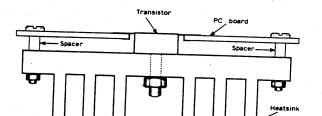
Mounting arrangements for pcb, transistor and heat sink
